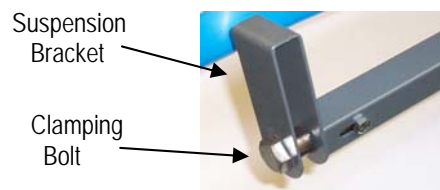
Suspension Bracket and Clamping Bolt Assembly
